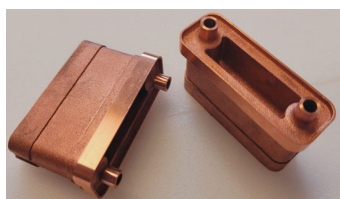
CuCr1Zr Additive manufacturing crotch (left) inserted and welded on the absorber bloc (right).
